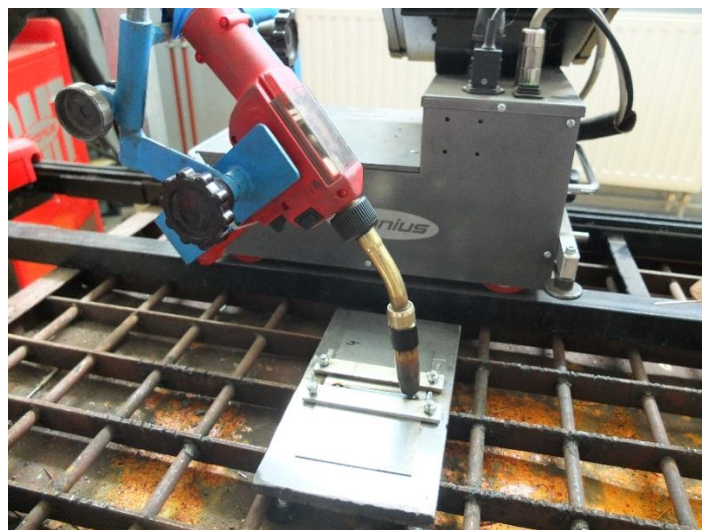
Experimental set-up used for the cold metal transfer MAG welding of low carbon steel thin sheets.
